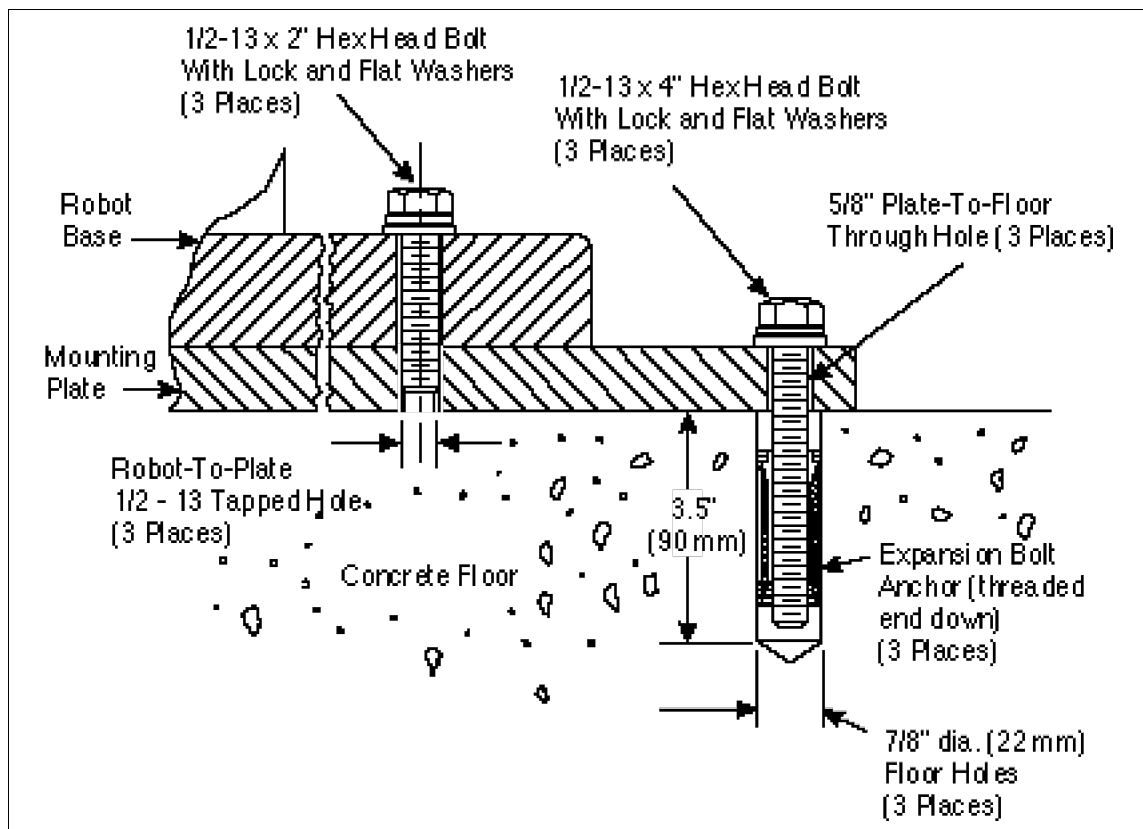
Mounting Plate-to-Floor Installation Detail
